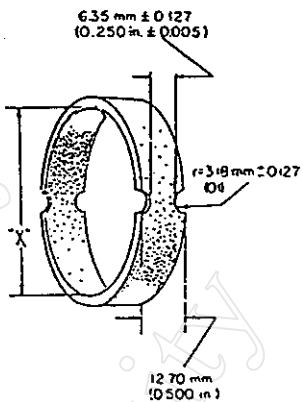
Reduced Section Specimen for Molded or Extruded Products
